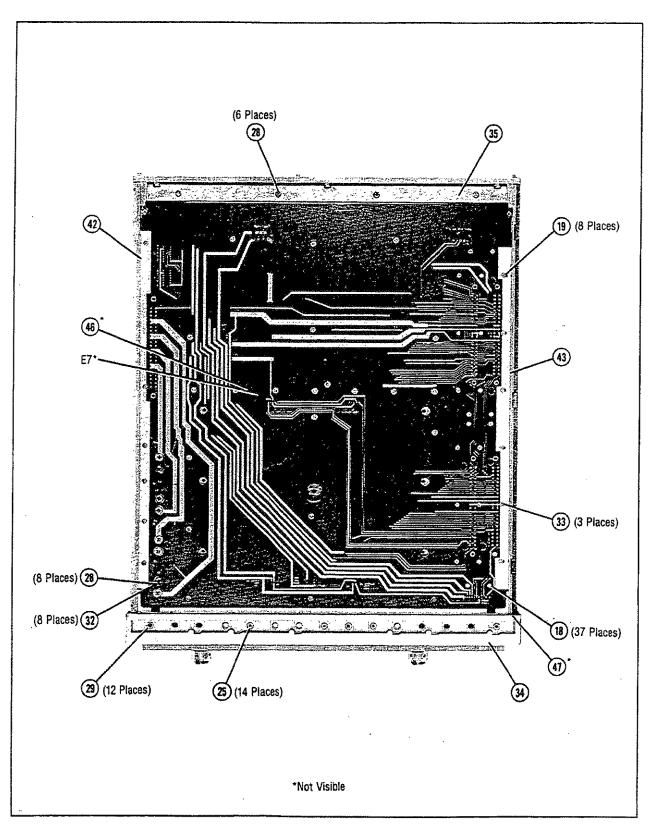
HP 8515A Miscellaneous Mechanical, Chassis, and Electrical Parts (3 of 5)
